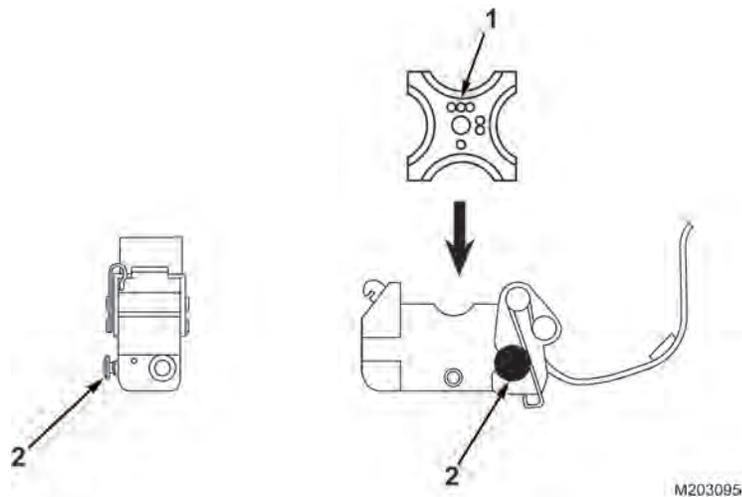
Five-Position Spacer Plate — No. 4 Position — M4 Carbine.
